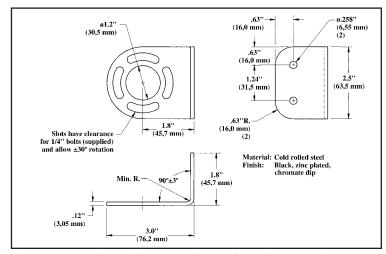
MACHINE-GUARD emitter and receiver mounting bracket dimensions.
